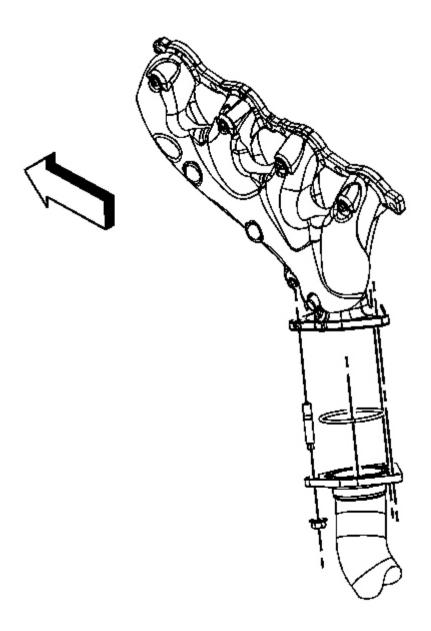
View Of Exhaust Manifold, Gasket & Catalytic Converter Courtesy of GENERAL MOTORS CORP.
